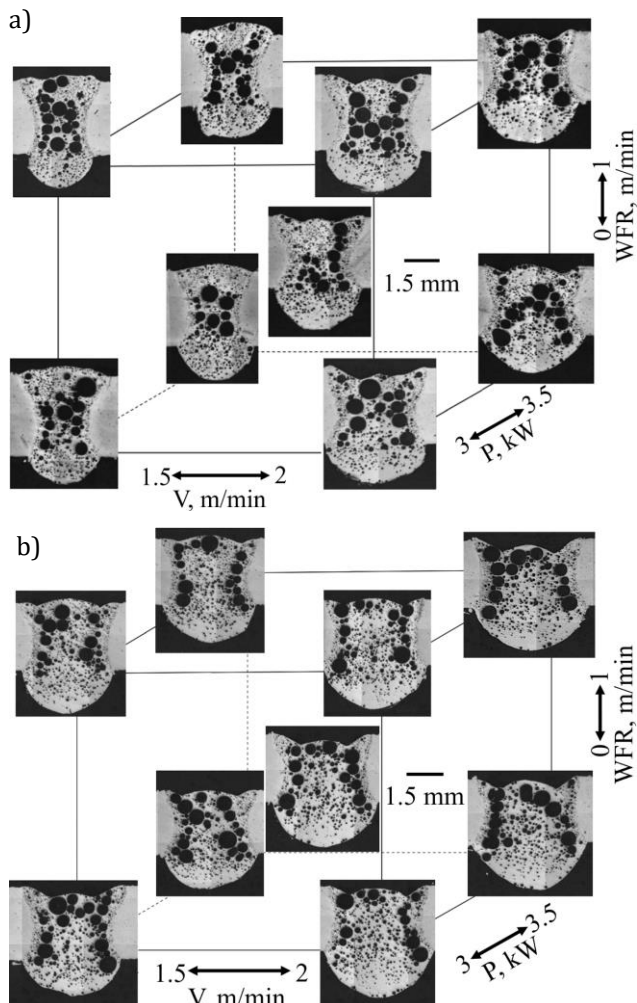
Weld cross sections achieved with a) stationary beam and b) oscillating beam.
